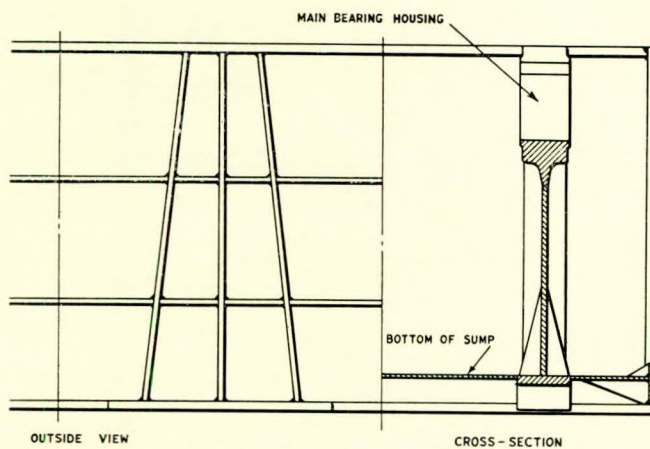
Longitudinal view of bedplate in 750/2,000 P.I. engine
